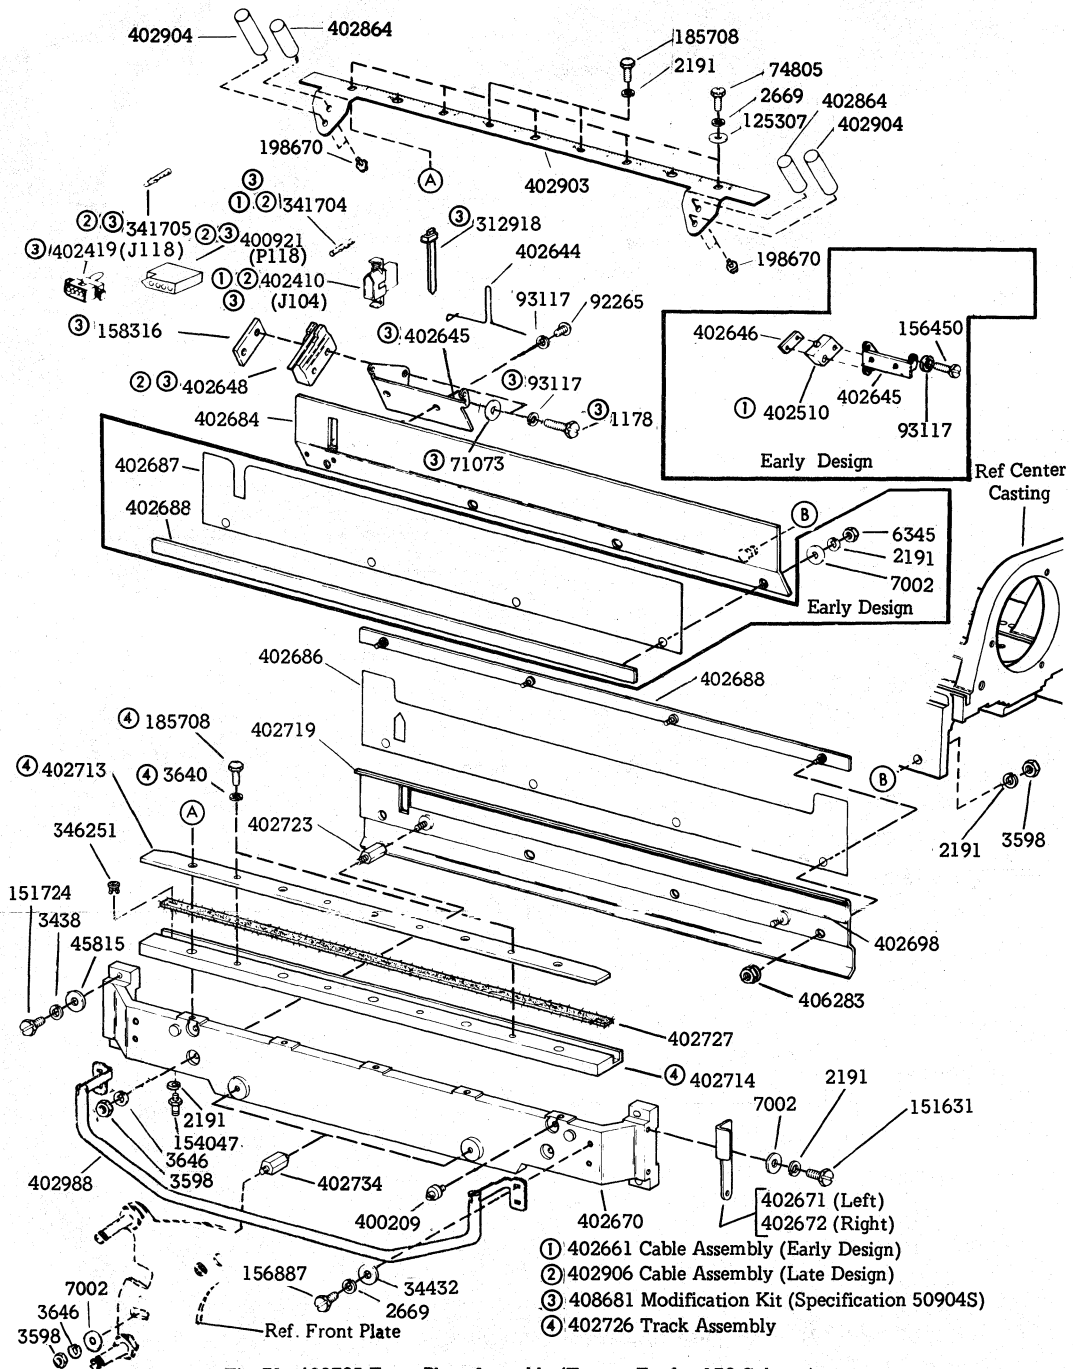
Front Plate Assembly (Tractor Feed - 132-Column)
